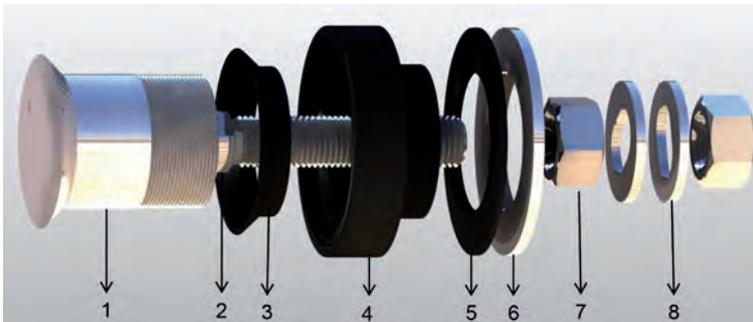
Articulated point support with fixture front plate and threaded body RDT 28-36 M14: hole in the glass
